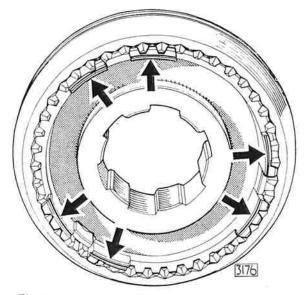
Identification grooves-3rd/Top, synchro assembly.
